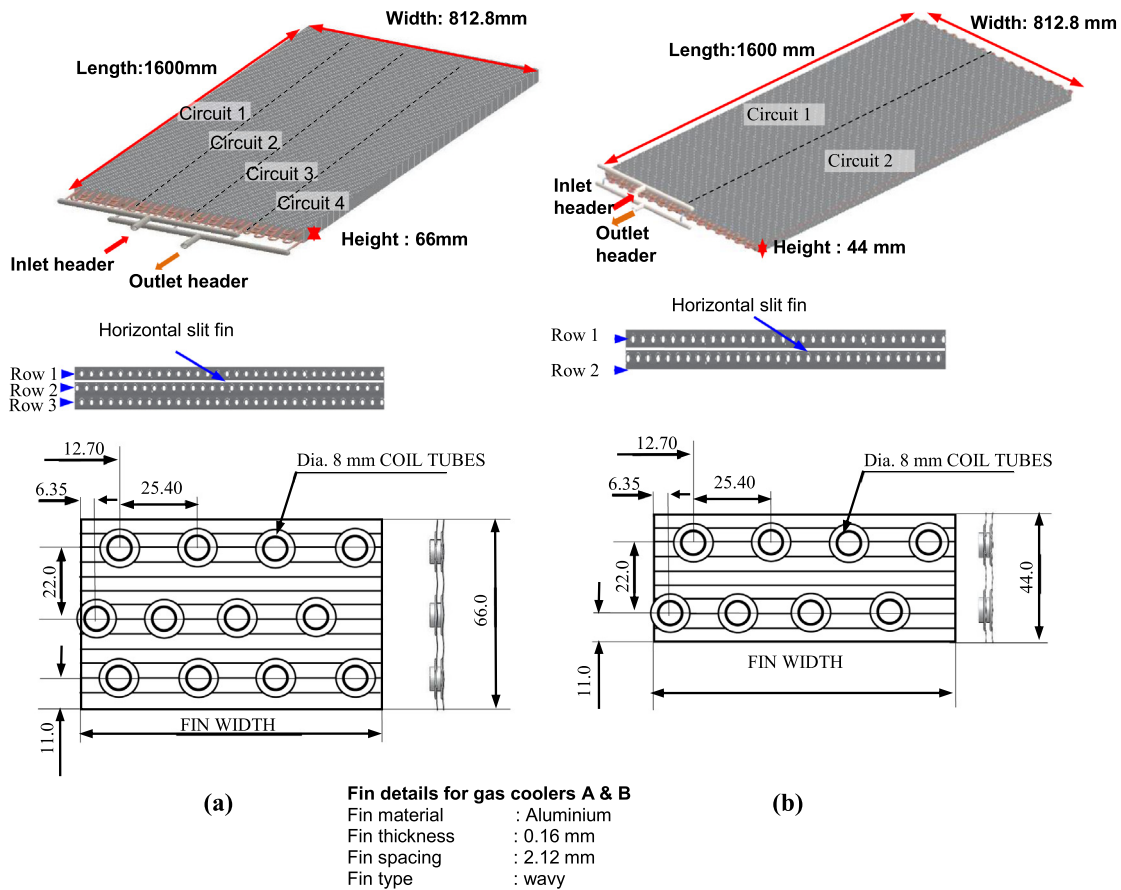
Gas coolers and fin details: (a) gas cooler A, (b) gas cooler B.
